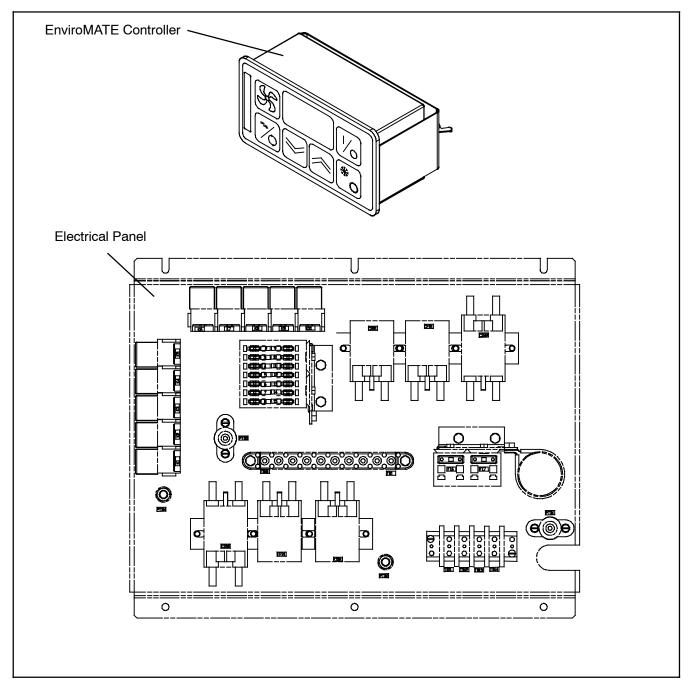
Panel Assembly, Control Box, EnviroMATE
